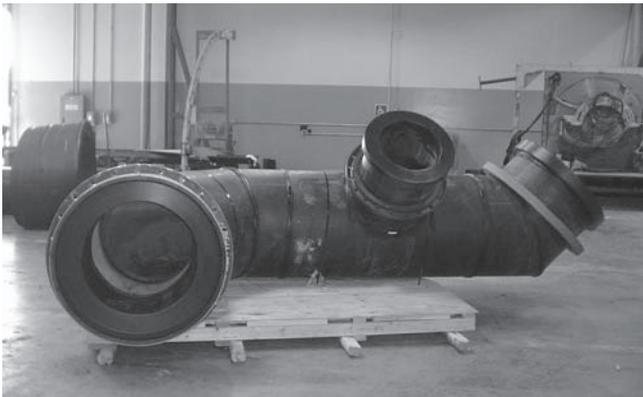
Fused Manifold Assembly with Flange Adapters and Back Up Rings
